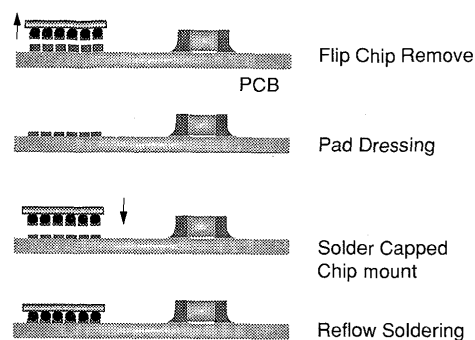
Schematic drawing of flip chip rework with solder capped chip
